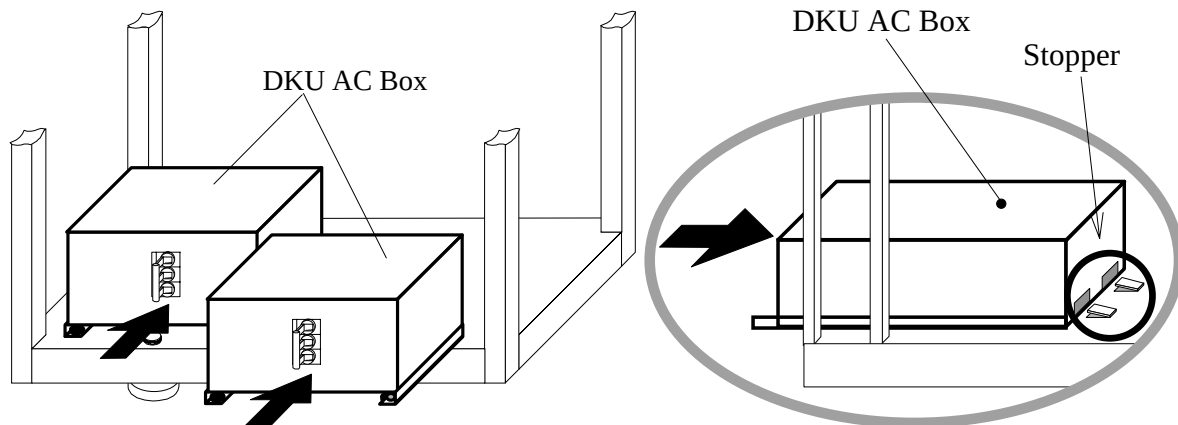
Attachment of DKU AC Boxes
